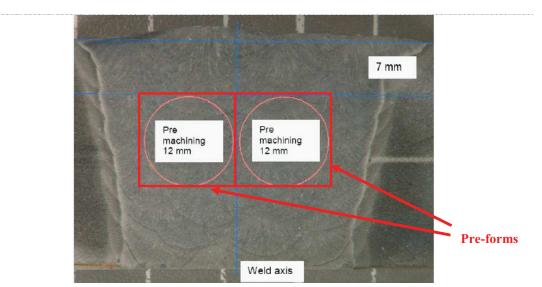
Position of Pre-forms Inside the Welded Zone—Macrographic View
